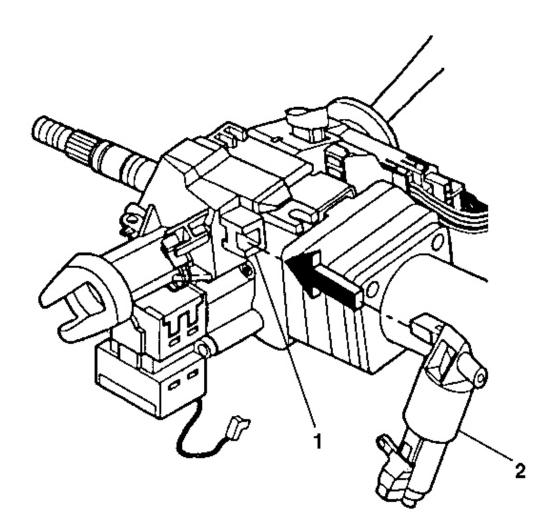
View Of Electric Park Lock & Ignition Lock Cylinder Case Assembly Courtesy of GENERAL MOTORS CORP.
